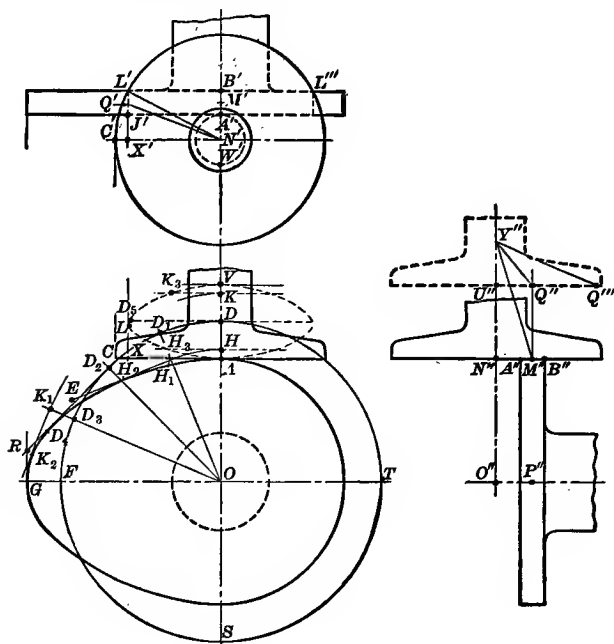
PROBLEM 7, CAM WITH FLAT SURFACE FOLLOWER—MUSHROOM CAM
